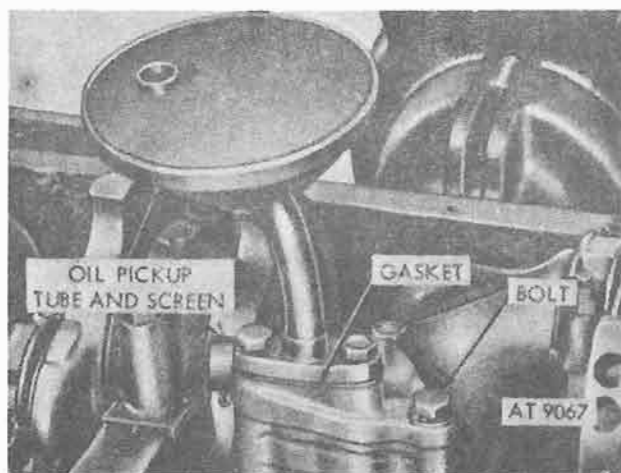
Oil pump, pickup tube, and screen assembly installation.
